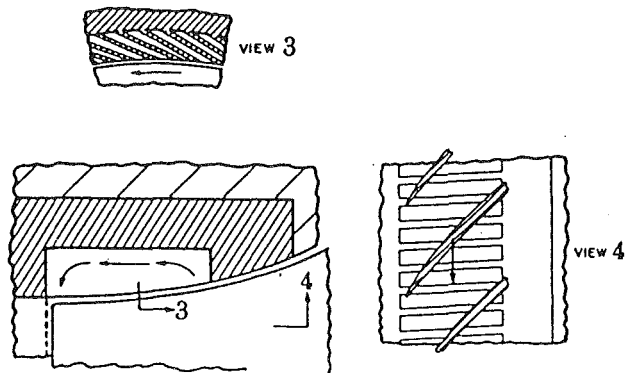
Inclined axial grooves at impeller inlet for surge limit improvement [66]
